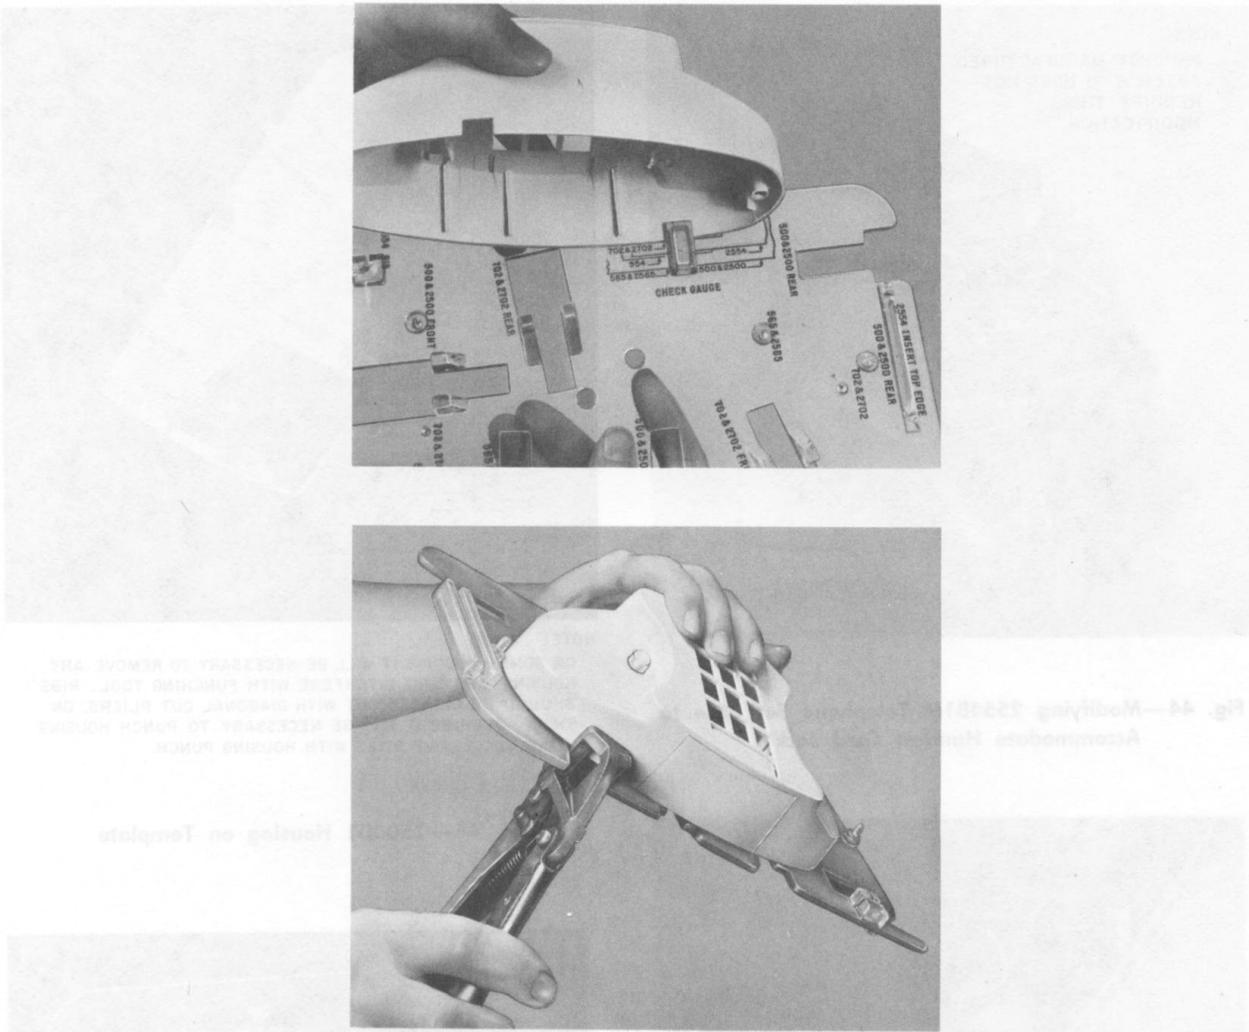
Notching 2702B1 Housing and Using Check Gauge
